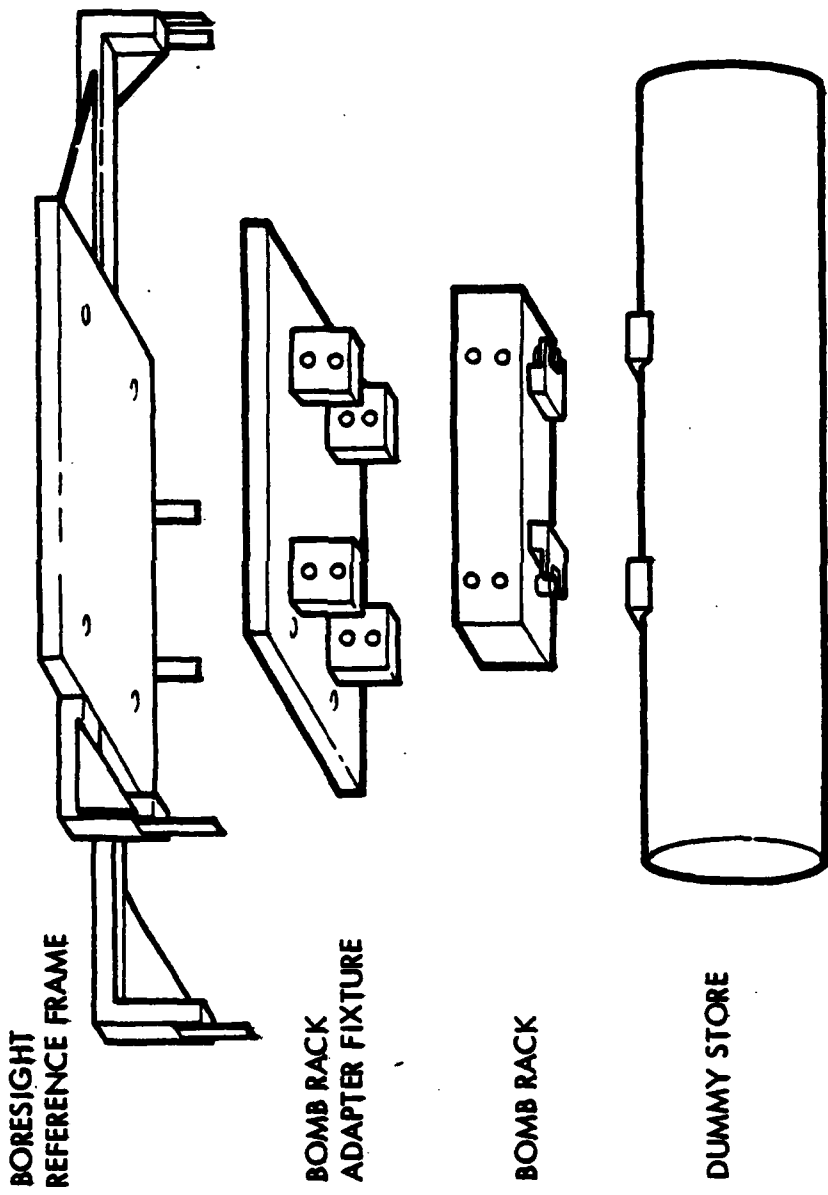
TYPICAL TEST ASSEMBLY FOR BORESIGHT MEASUREMENTS
